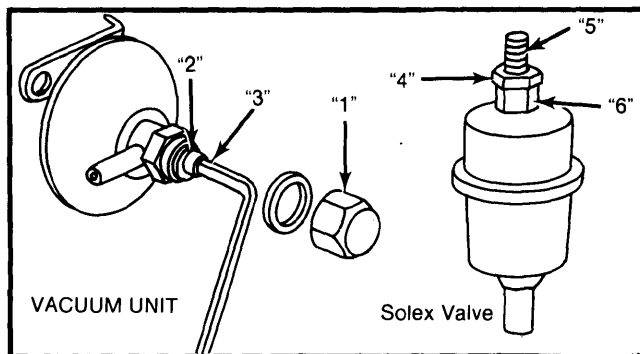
Adjusting Fast Idle at Deceleration Vacuum Unit
